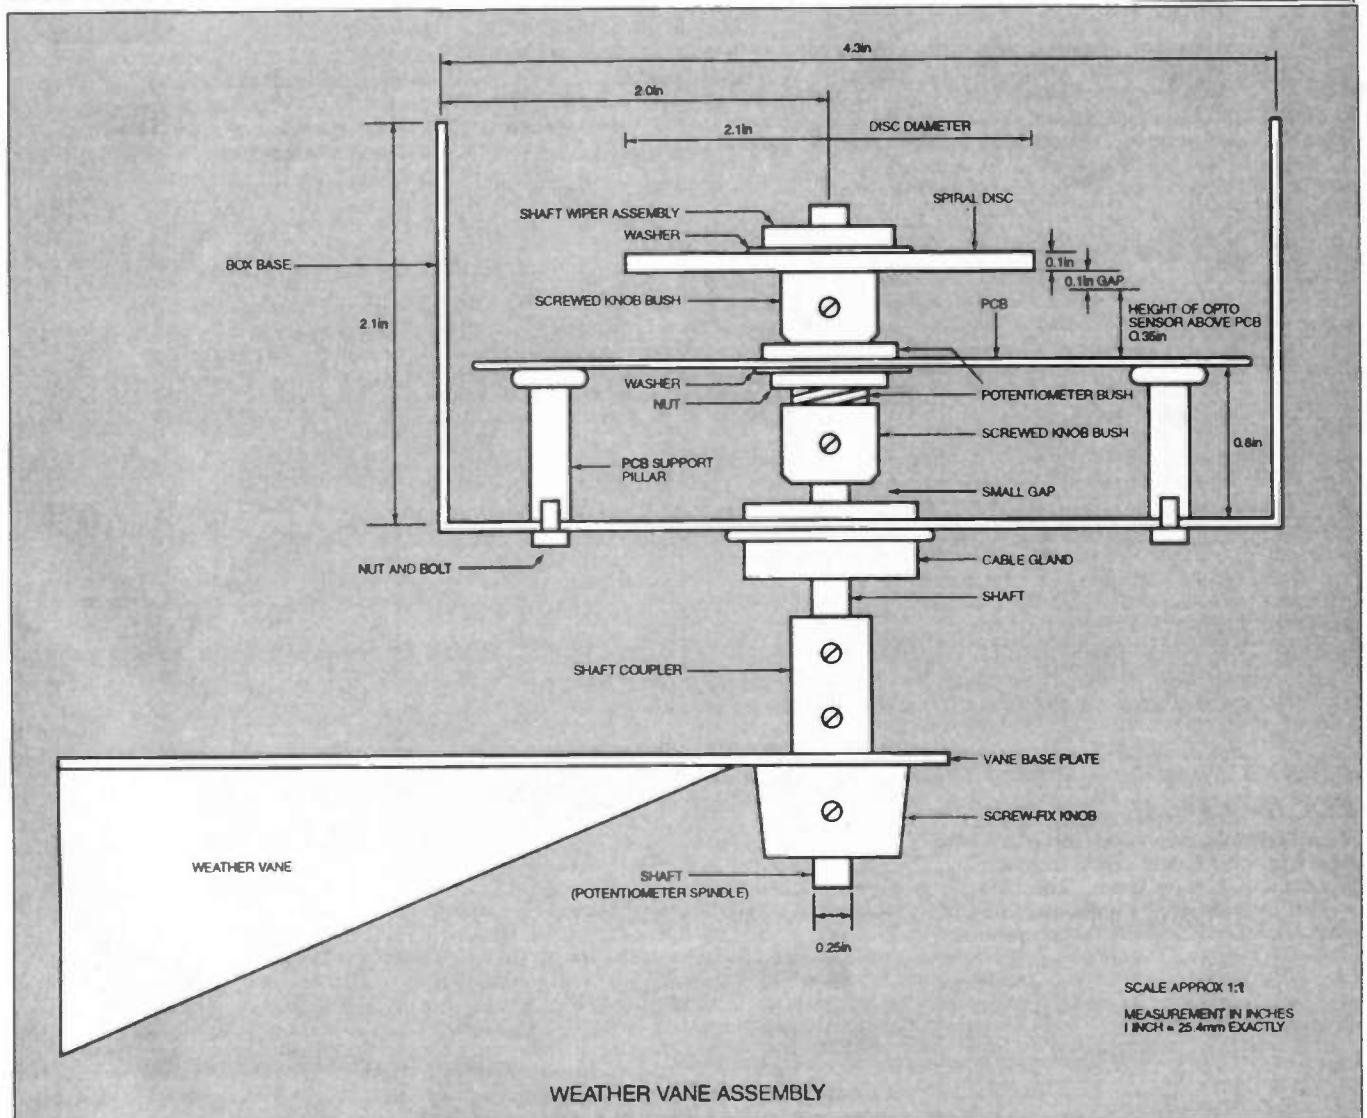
Constructional details and mechanical assembly of the wind direction vane.
